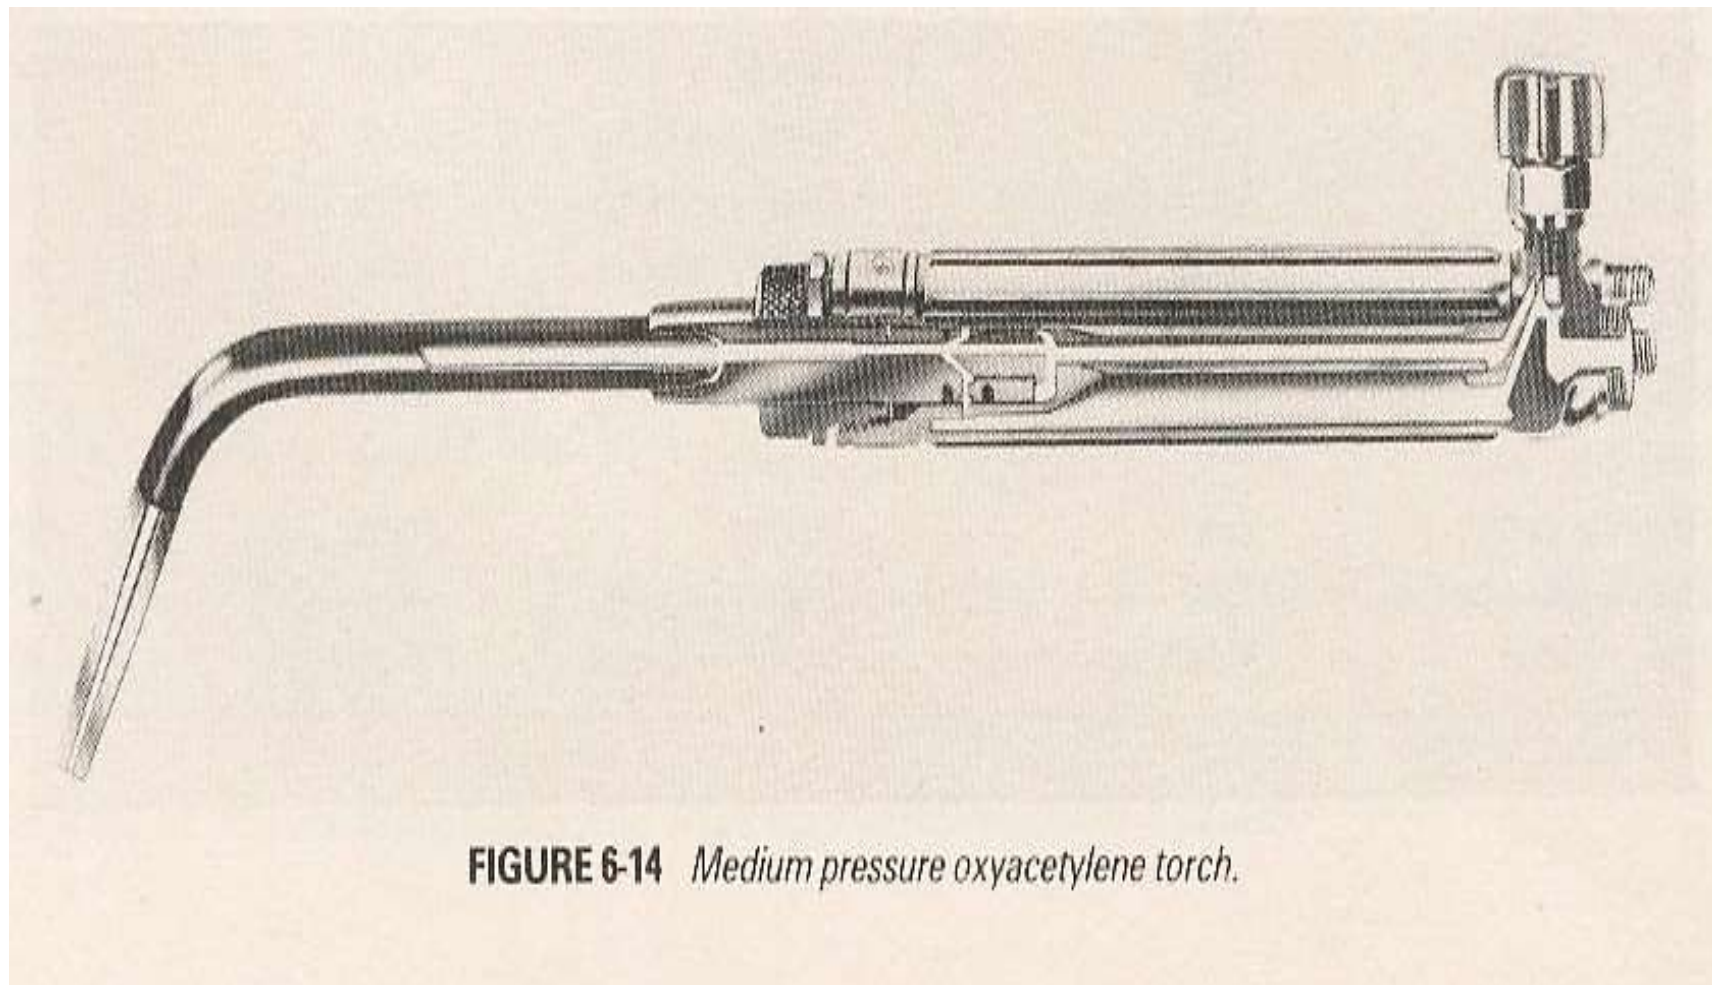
Medium pressure oxyacetylene torch.
